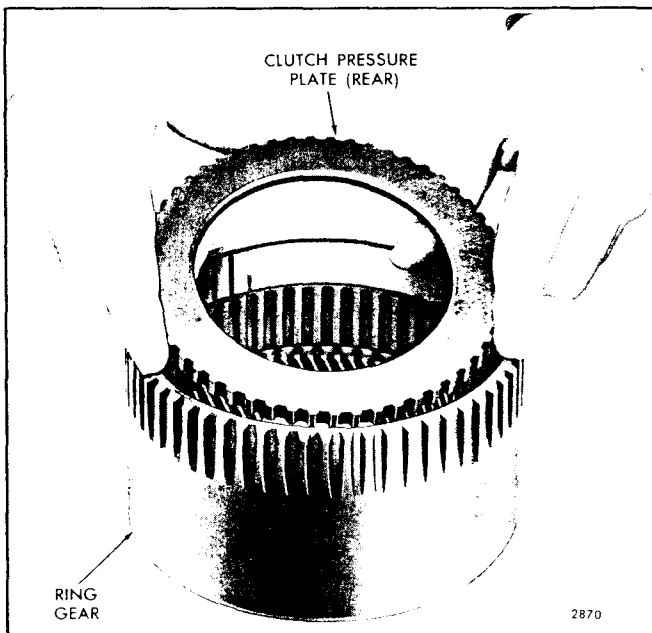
Installing Rear (Forward) Clutch Pressure Plate in Ring Gear
